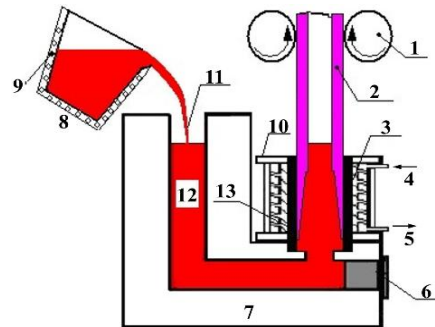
Schematic of vertical continuous casting (1) Pulling roller, (2) Hollow profile, (3) Crystallizer, (4) Water intake, (5) Water outlet, (6) Liquid iron mouth, (7) Continuous casting furnace, (8) Teapot ladle, (9) Heater, (10) Upper flange, (11) Casting port, (12) Molten iron, (13) Graphite sleeve
